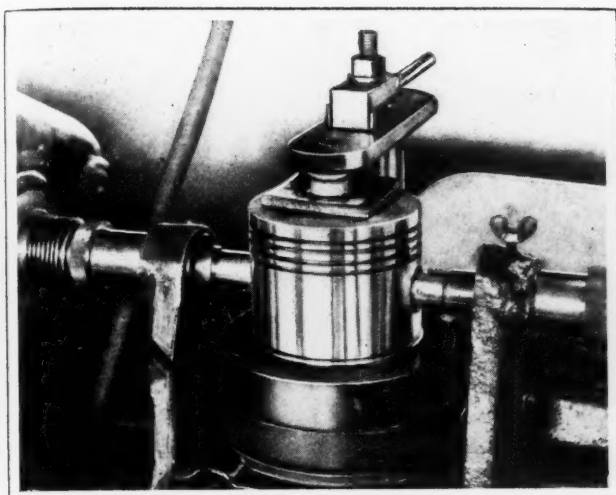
Boring Piston-pin Hole on Engine Lathe
